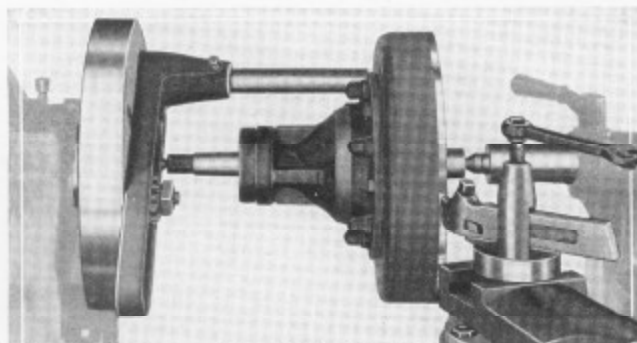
Brake Drum and Hub of Wire Wheel Mounted on Taper Mandrel
